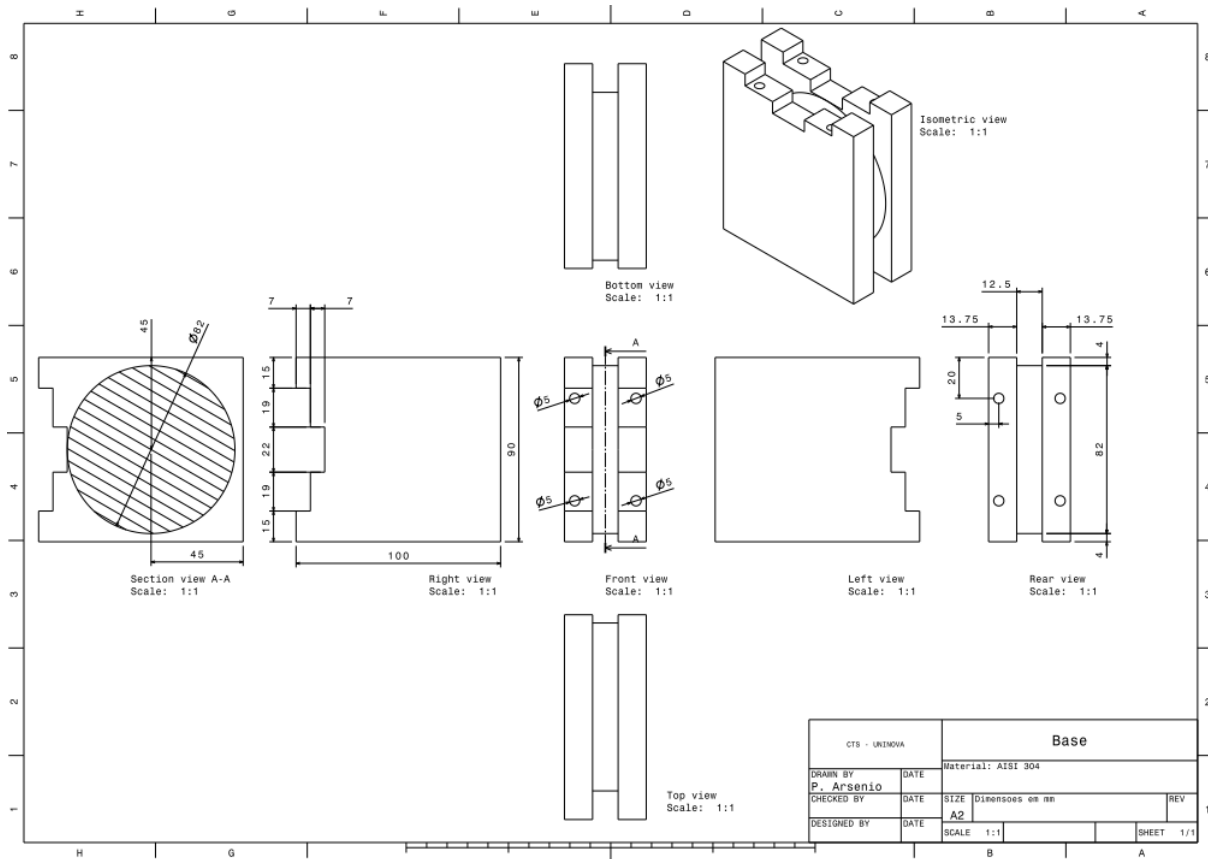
Dimensions, in mm, of the base piece of the stainless-steel holder (not to scale).
